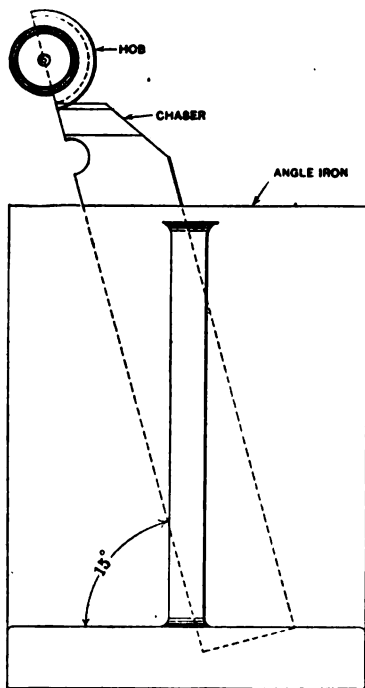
Milling Machine Arranged for Hobbing Chasers.
